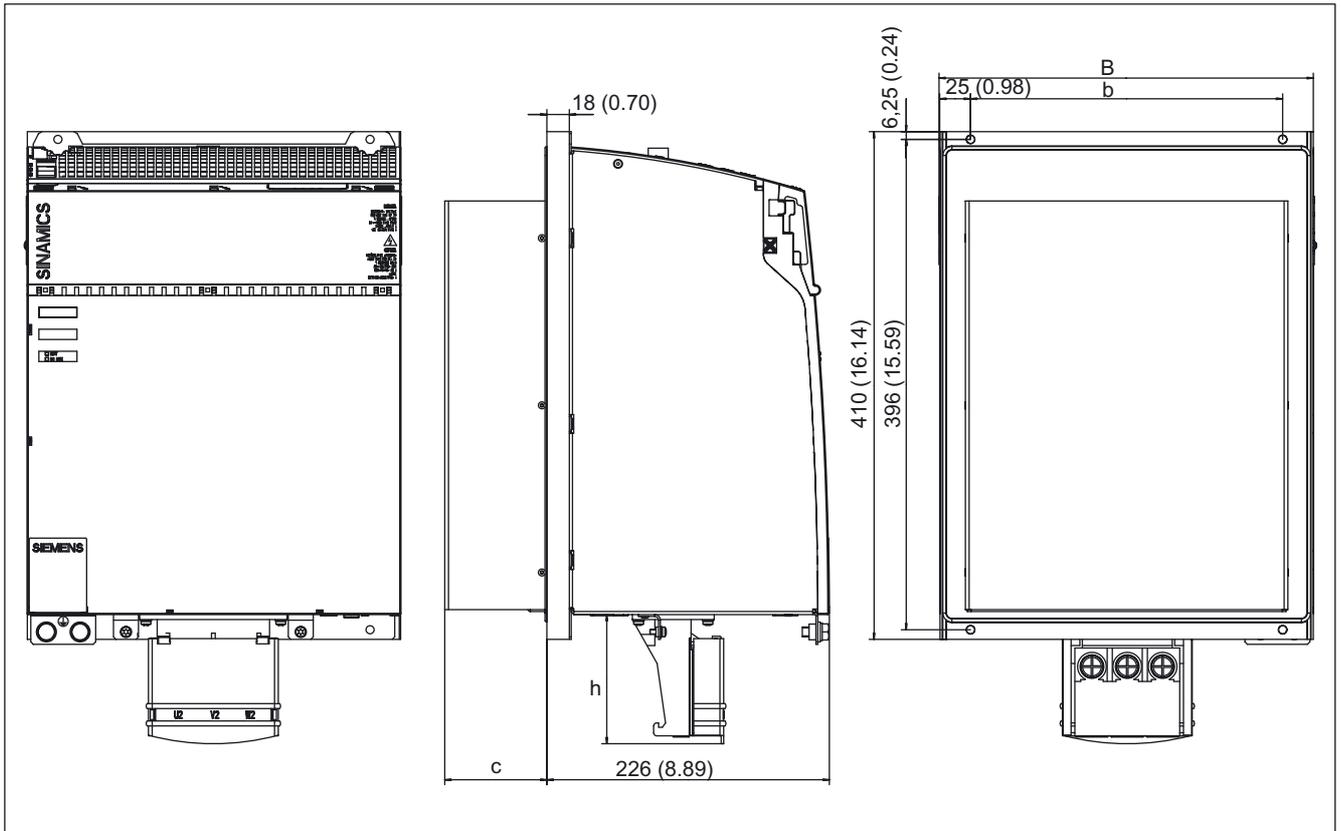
Dimension drawing of Motor Modules with external air cooling 132 A and 200 A, all dimensions in mm and (inches)
